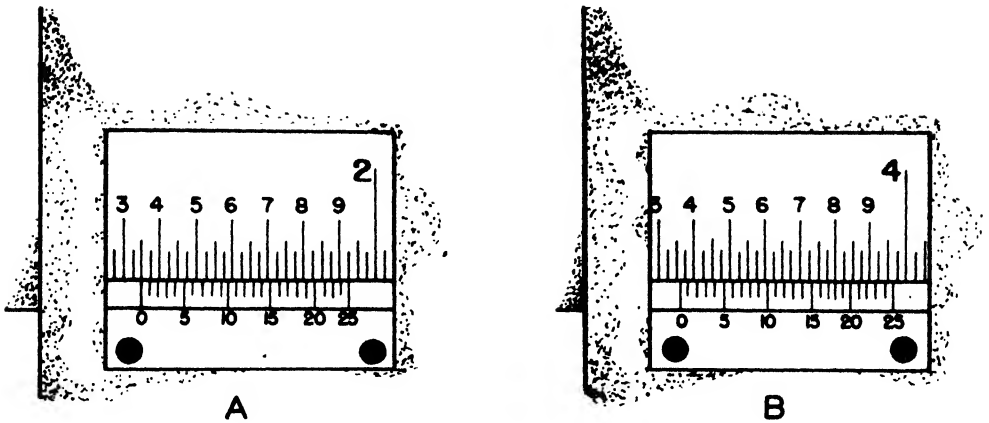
EXAMPLES OF VERNIER CALIPER SETTINGS.
